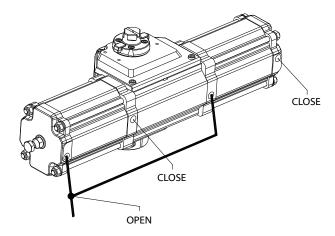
Pneumatic actuator type A with two cylinders and schematic drawing of the to-connect air pipes (single acting - spring to close A-SC)
